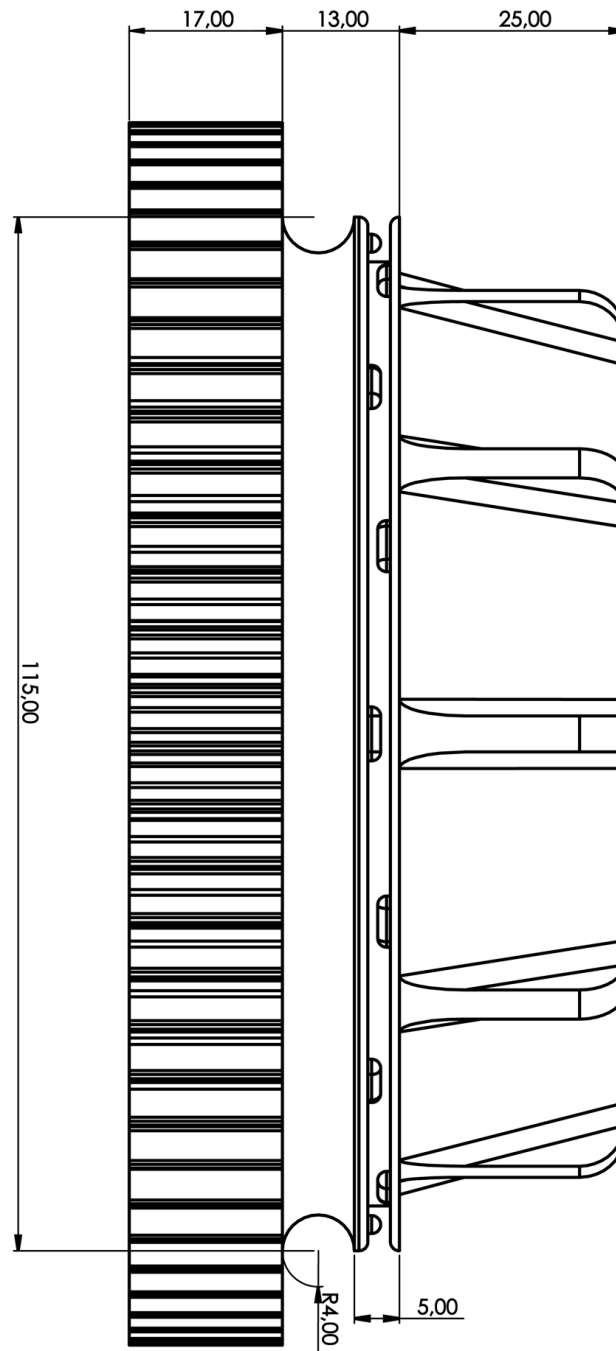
Tube end piece with thread gap. The gap is designed to anchor the thread for winding the thread on the cylinder.
